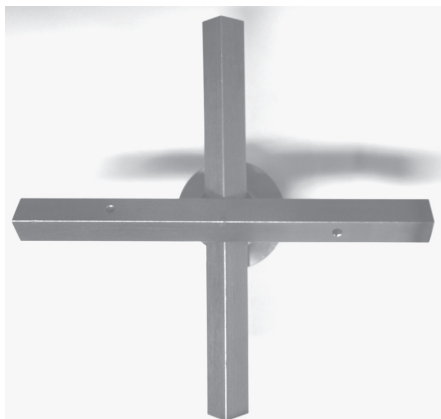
The SGAT drilling tool. The test pieces have 1 × 1 cm cross-section, and the holes on the lower steel bar is the nozzles for soil conditioning additives.
